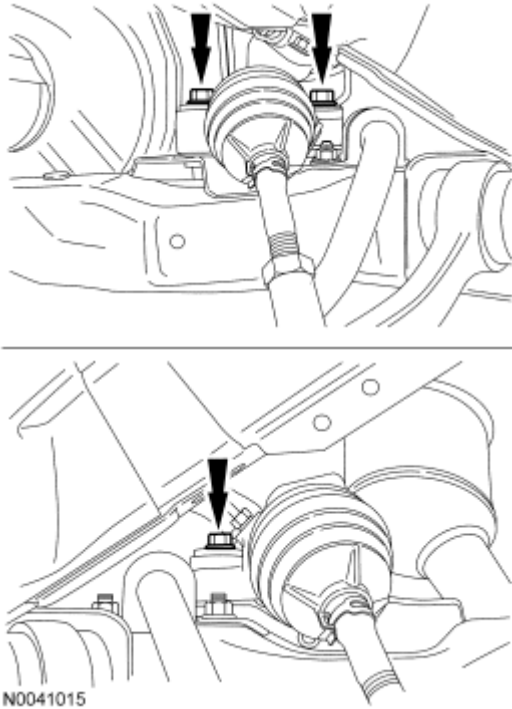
Locating Subframe Support Brackets And Bolts
